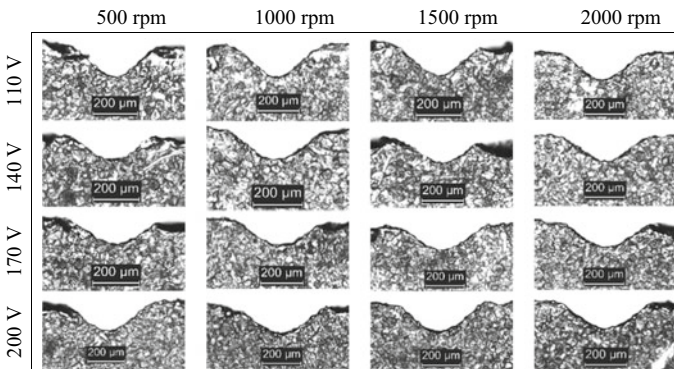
End side of the microslots machined by  $\mu$ ED-milling
